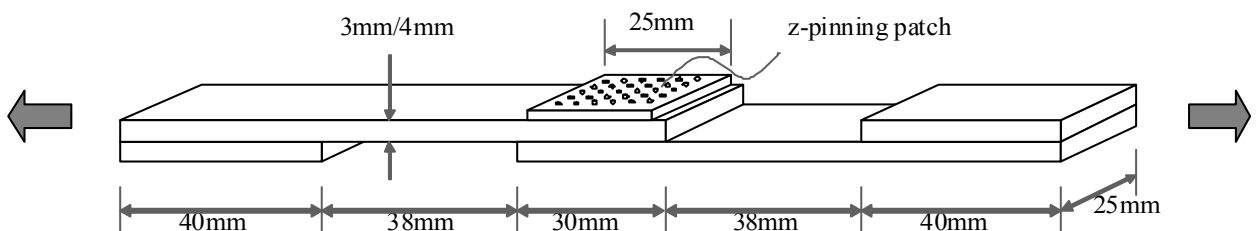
Schematic diagram of the manufactured single-lap shear joint specimen
